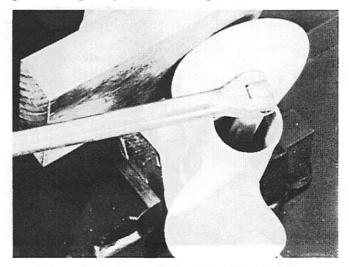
Removing & Installing Propeller Nut Reprint Oct. 1962 Pa
